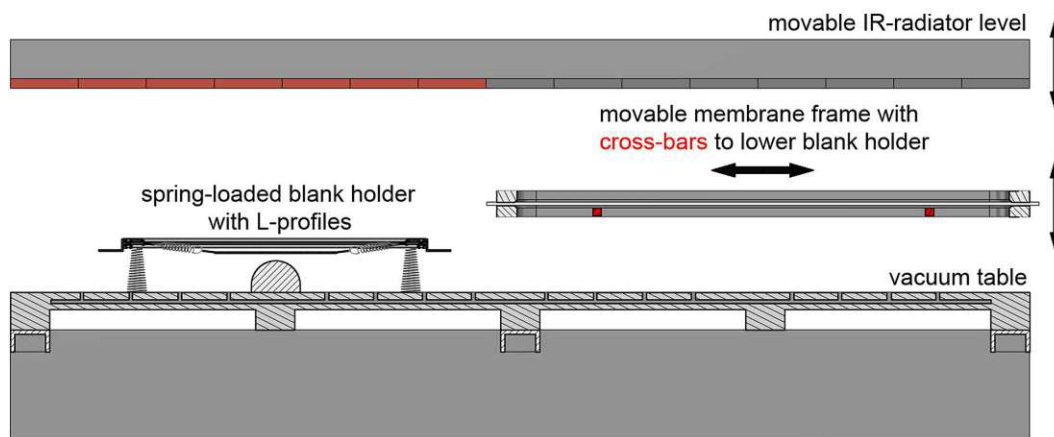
Single diaphragm forming (SDF) machine setup with lowerable spring-loaded blank holder.
